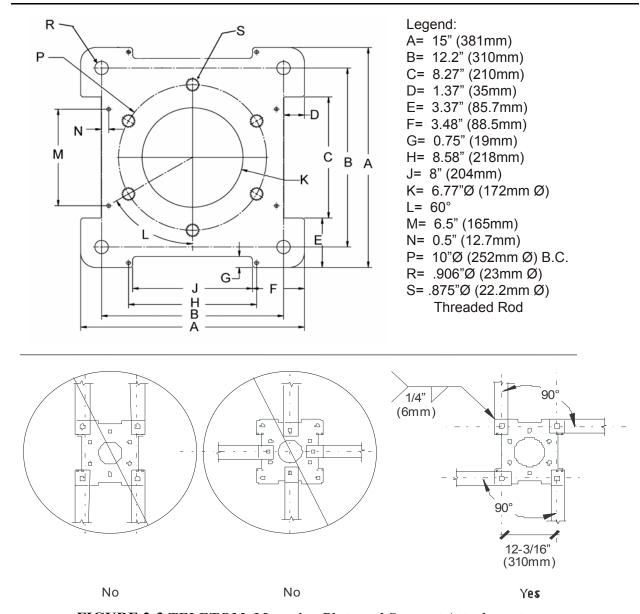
TELETOM® Mounting Plate and Support Attachments
